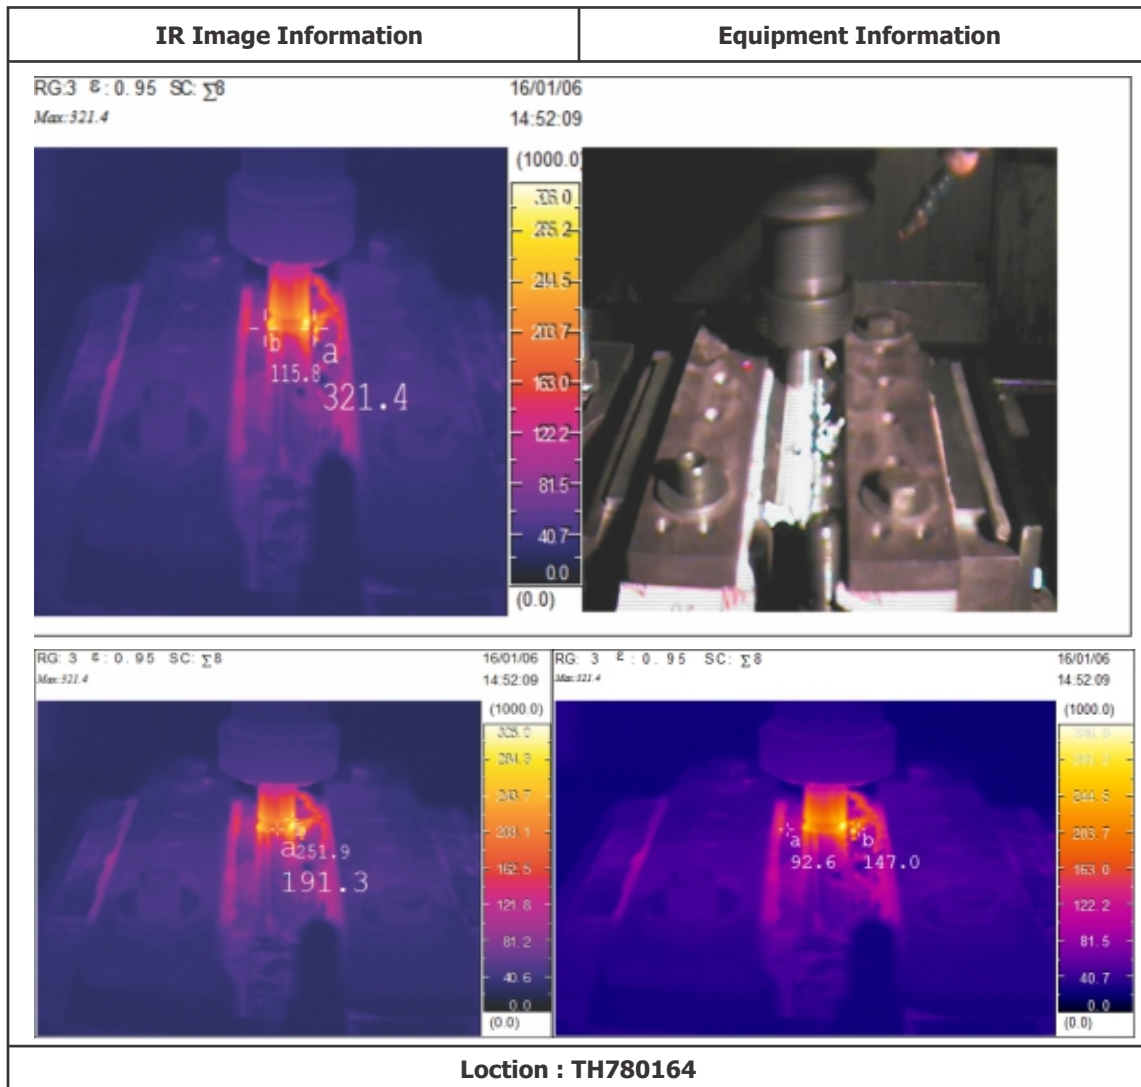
IR image for welding AA6082 T6 alloy with spindle speed 1000 rpm and welding speed 24mm/min, using BT2 tool (LHS= Advancing side, RHS=Retreating side)
